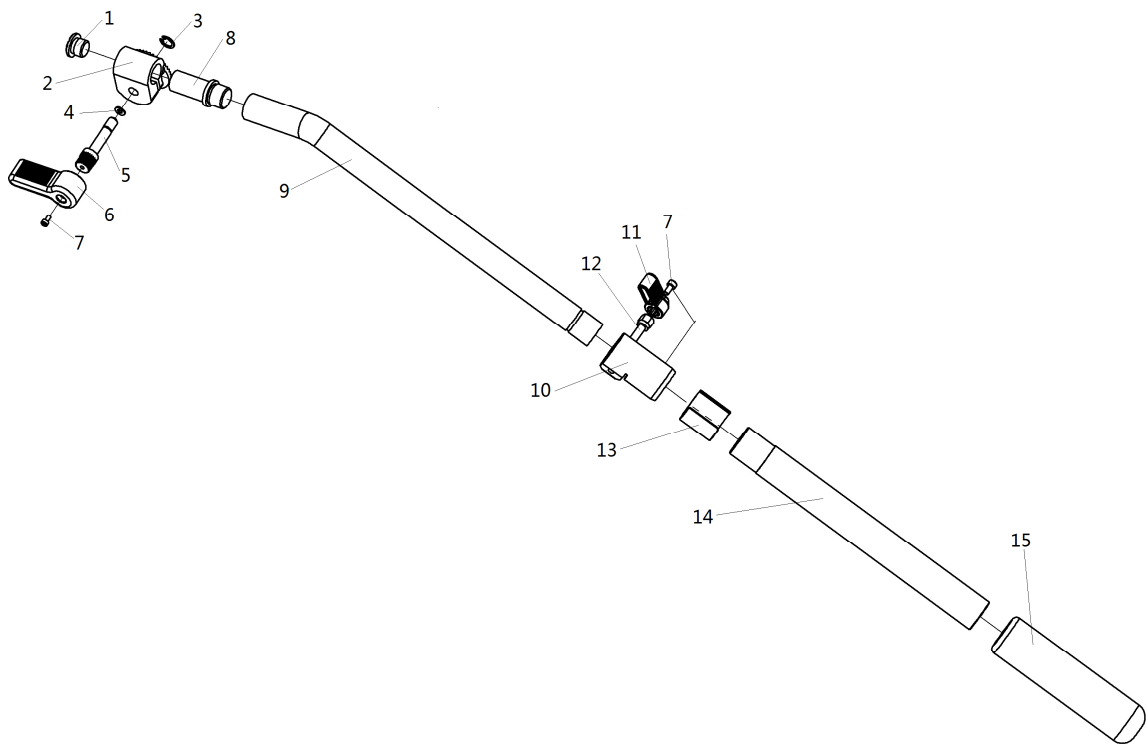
REACH PLUS 5 Fluid Head—Pan Bar Unit Assembly
